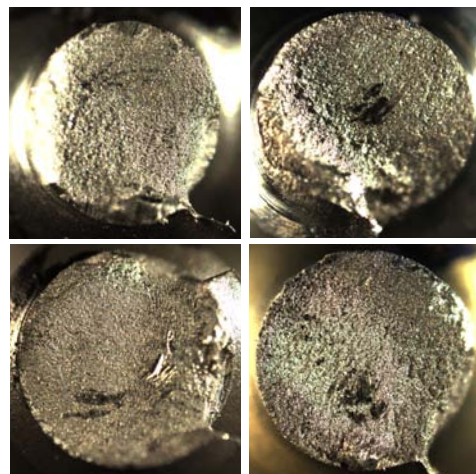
Fracture surfaces of the screws after their failure. (a) V2 (b) V4 (c) V1 & (d) V3.
